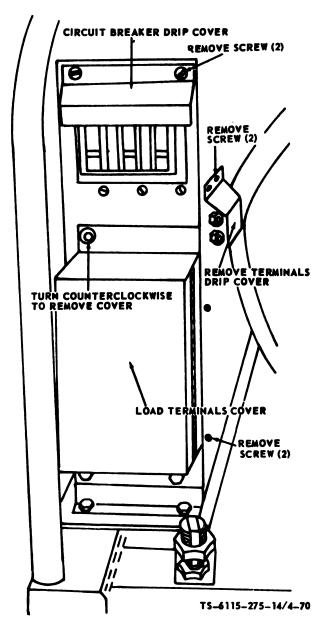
Remote terminals drip cover, circuit breaker drip cover, and load terminals cover, removal and installation (Model MEP-018A).
